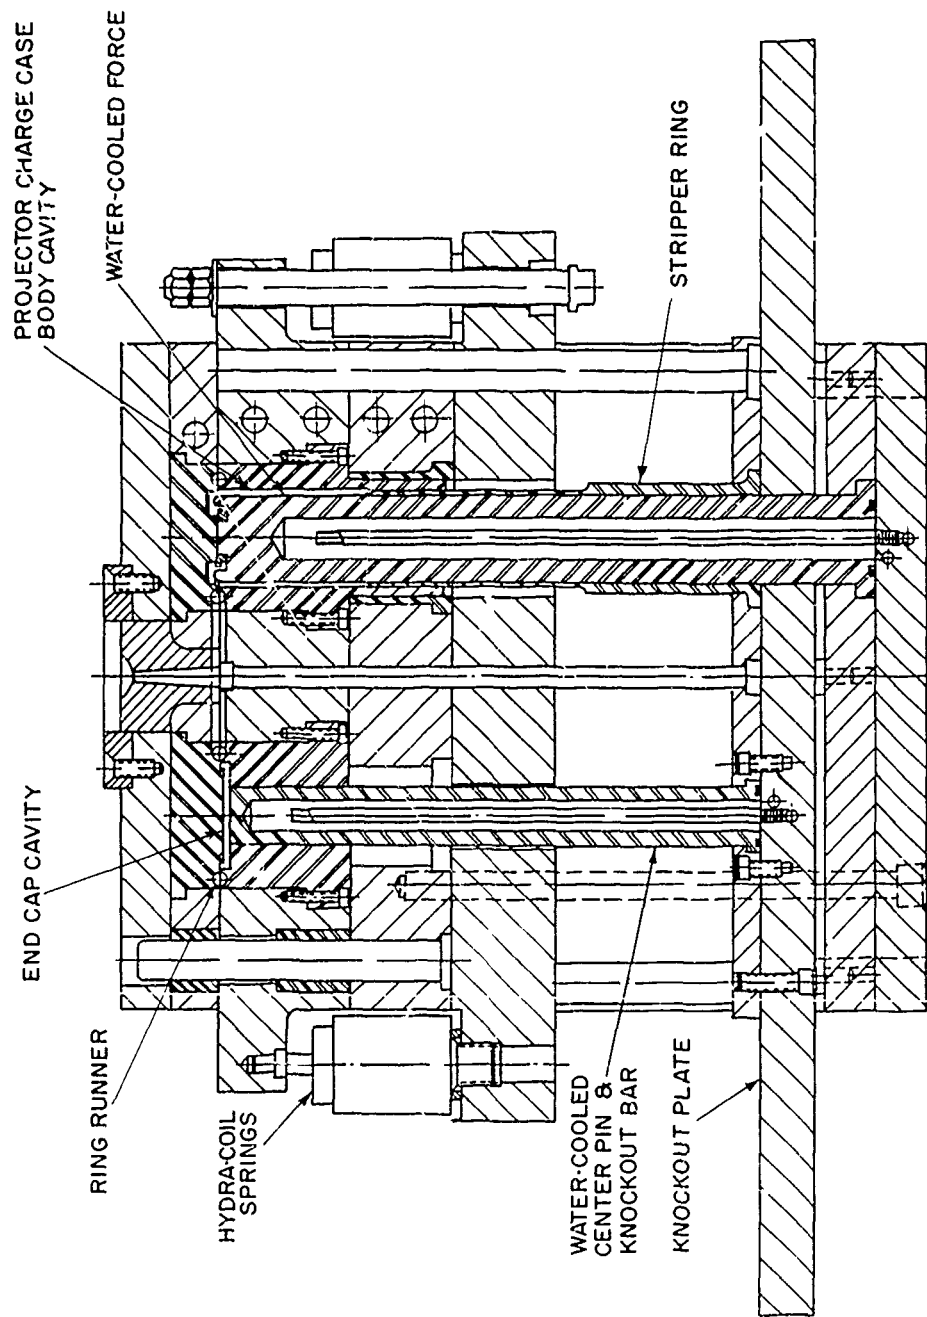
SCHEMATIC DRAWING OF INJECTION MOLD DESIGN FOR PLASTICS PROJECTOR CHARGE CASE
